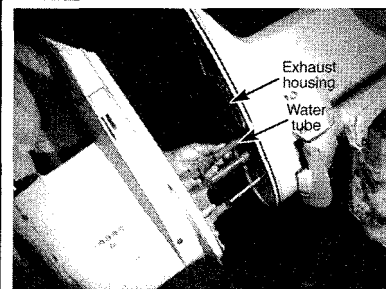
Install the gearcase, carefully aligning the driveshaft, water tube and shifter rod
